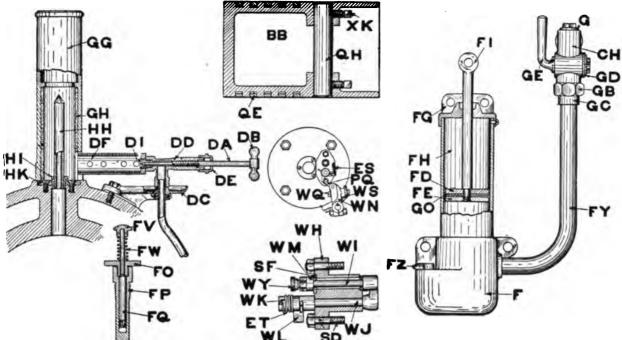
Vertical Gasolene Engine. Fairbanks-Morse & Co.
